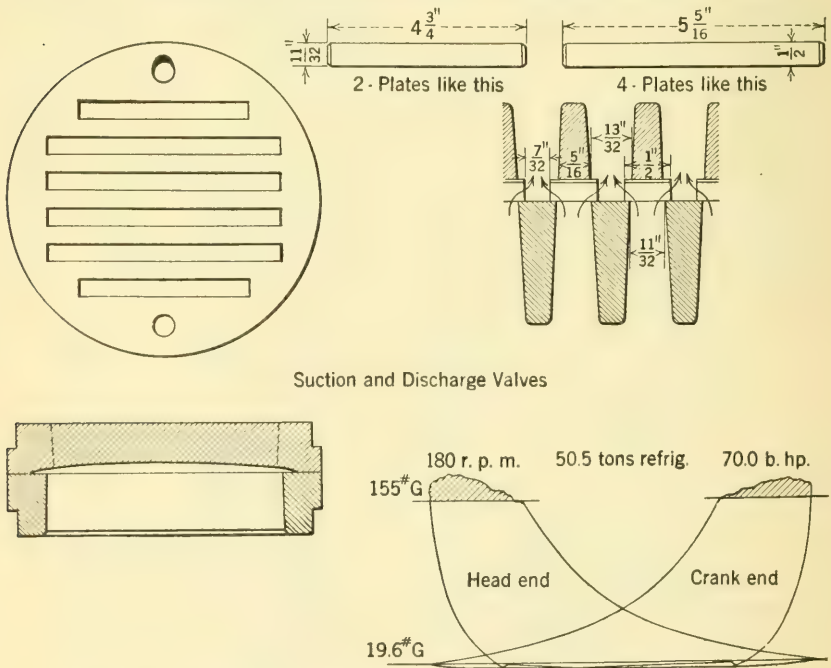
Details of the Ribbon Type of Valve, with Indicator Card.
